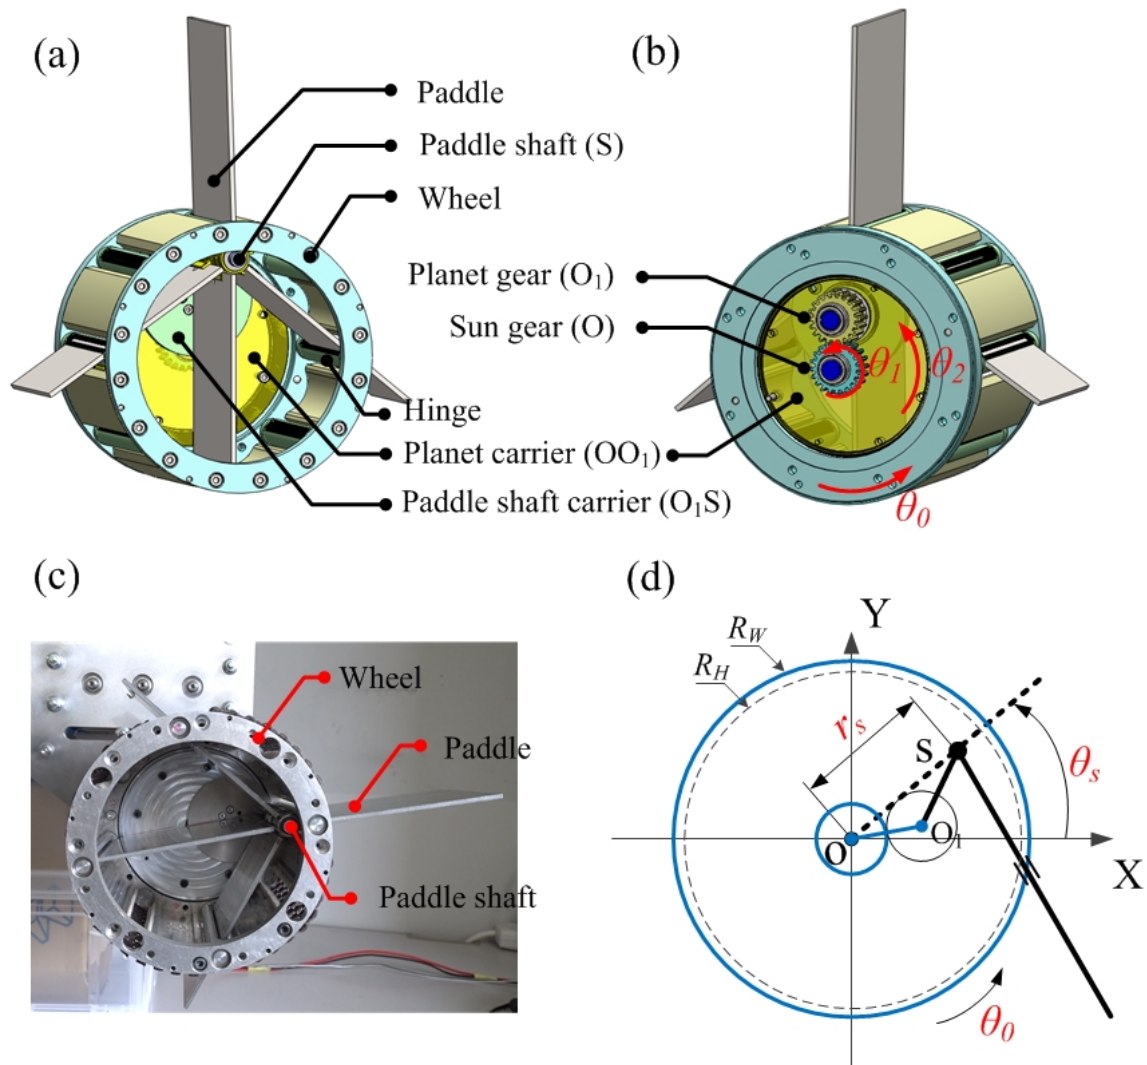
Single module design of the eccentric paddle mechanism: (a) front view of the 3-D model; (b) back view of the 3-D model; (c) picture of one prototype; (d) schematic drawing of the mechanism.
